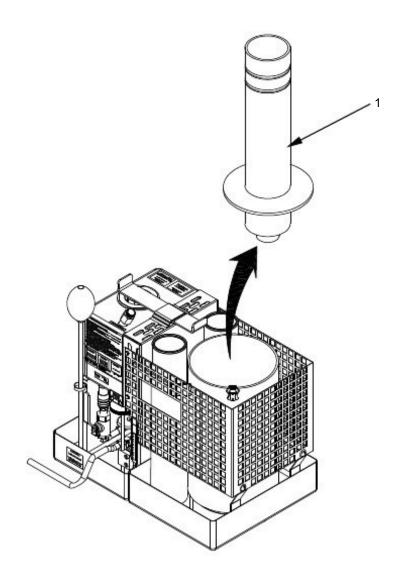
Group 04 Down Tube Assembly 0034 00-(1 Blank)/2
